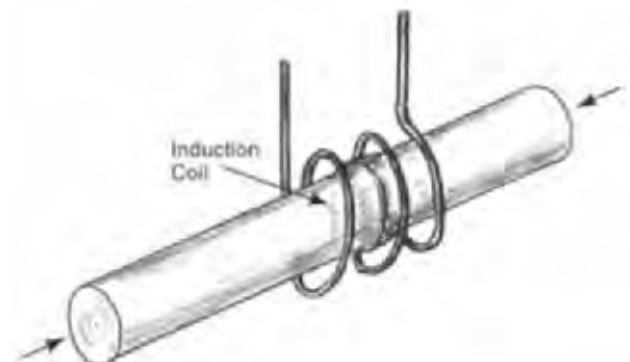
C2 Induction welding the ends of two metal bars together.
